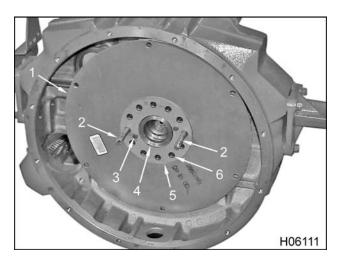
Removing flexplate (MD-3000 and HD-4000 Series Transmissions)
